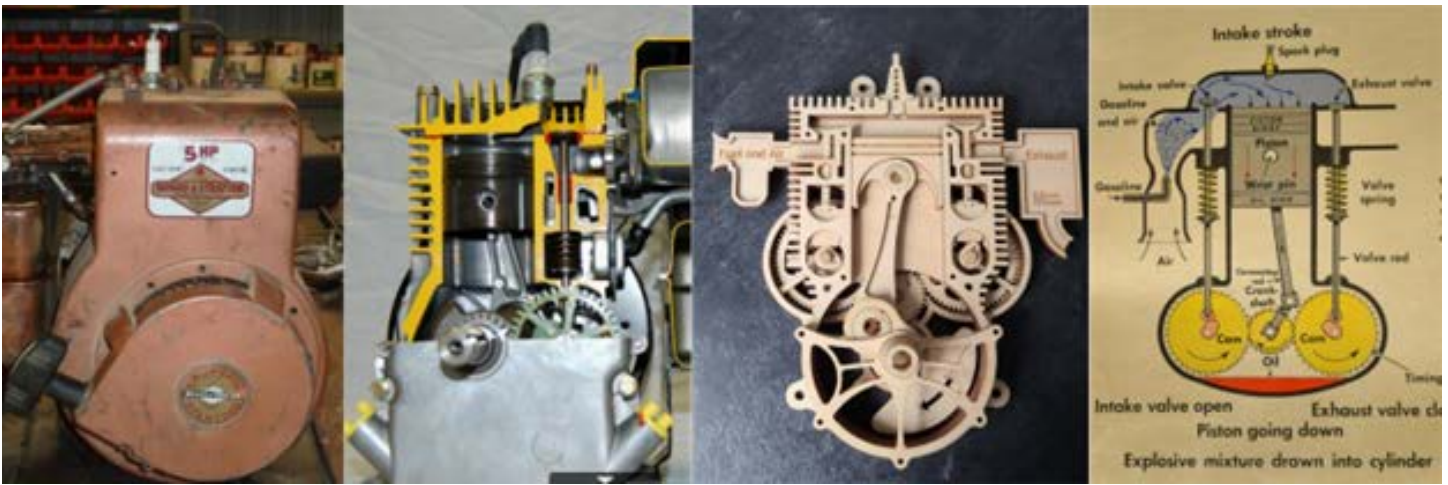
Flathead engine, cutaway of engine, my rearranged “Flat Flathead” model, and a 1955 diagram from my personal collection showing similar rearrangement. Image credit Author, Welch, 1955.
